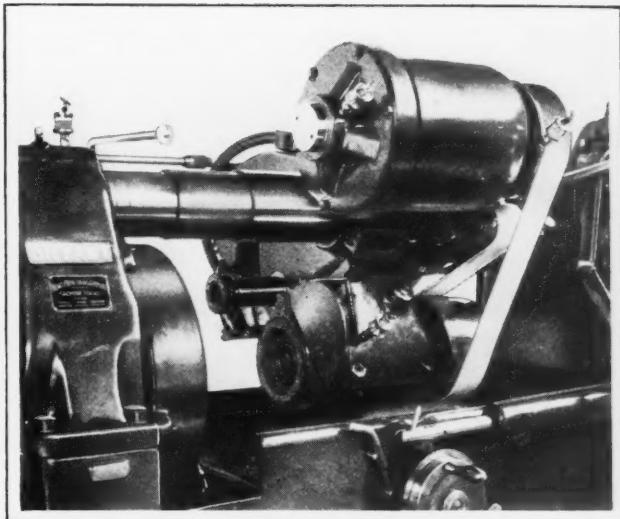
Wheel-slide in Position for a Face Grinding Operation
